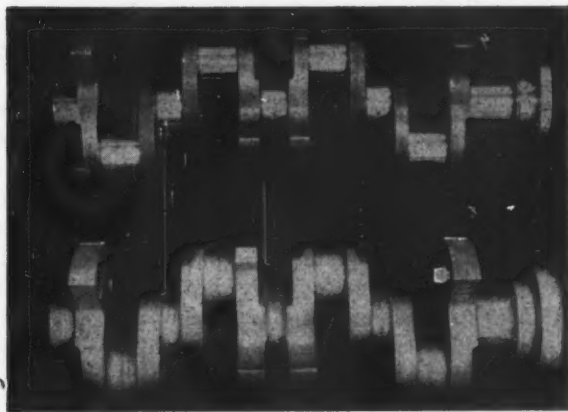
Cast-steel crankshaft for 600-horsepower tank engine. Surfaces are nitrided after machining
